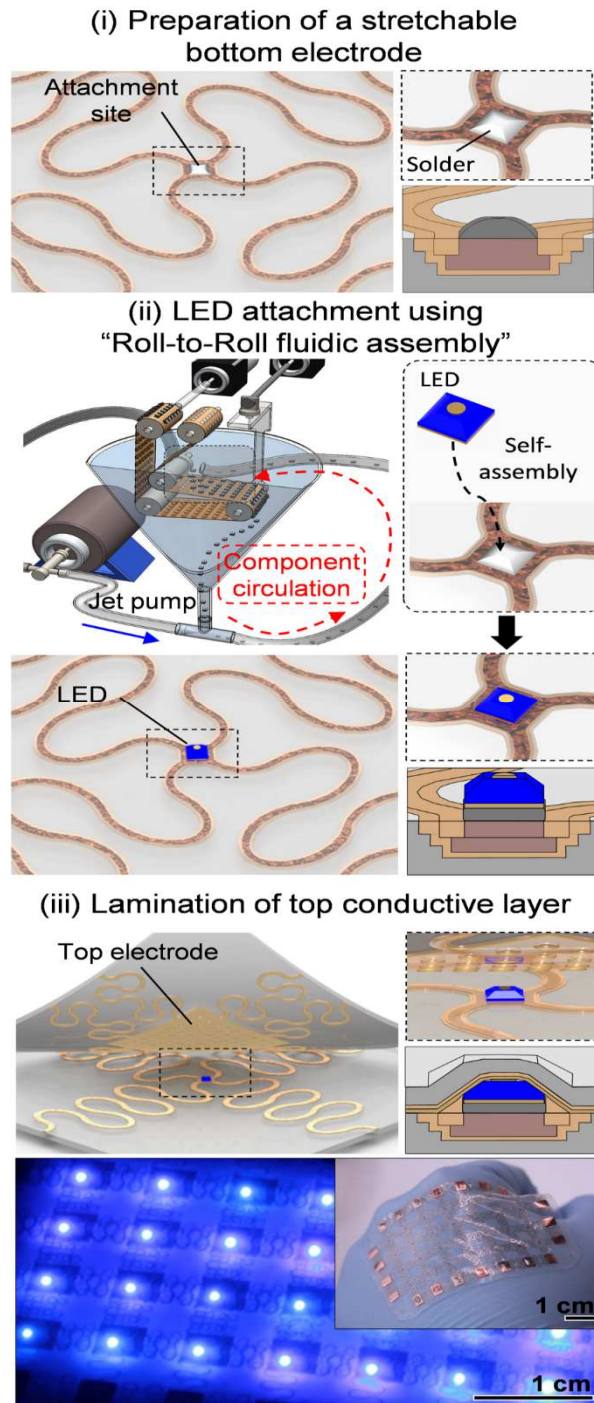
Overview of the three basic steps used to fabricate a rubber-like solid-state lighting module: (i) preparation of a stretchable bottom electrode with solder coated attachment site, (ii) the attachment of the LEDs using solder directed fluidic self-assembly, and (iii) the lamination of a stretchable top conductive layer.
